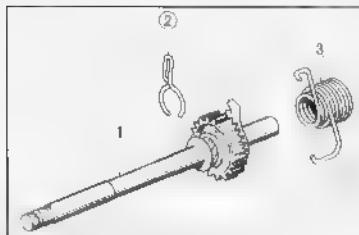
① Kick starter spindle ② Kick starter spring
